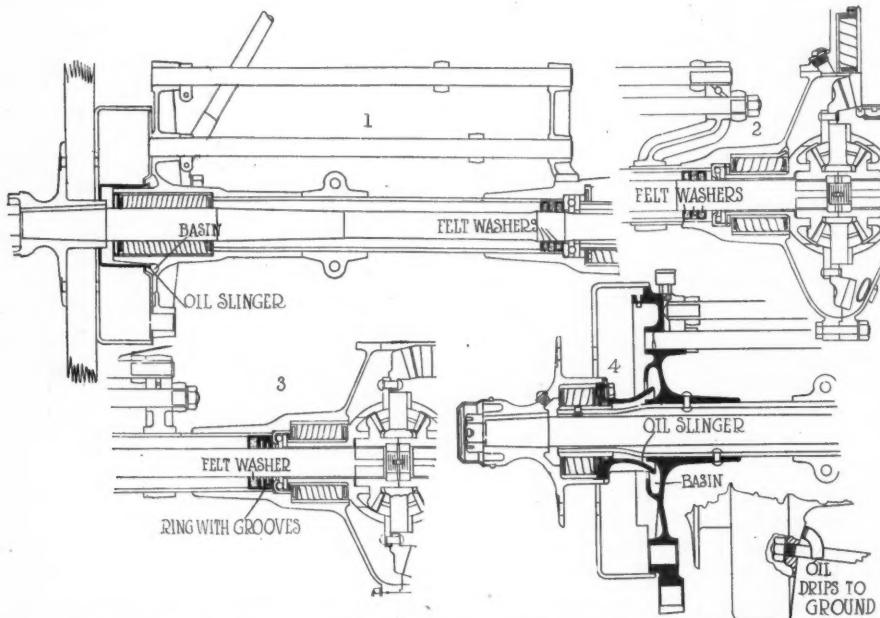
METHODS USED IN MOTT AXLES FOR PROTECTING BRAKE BANDS
